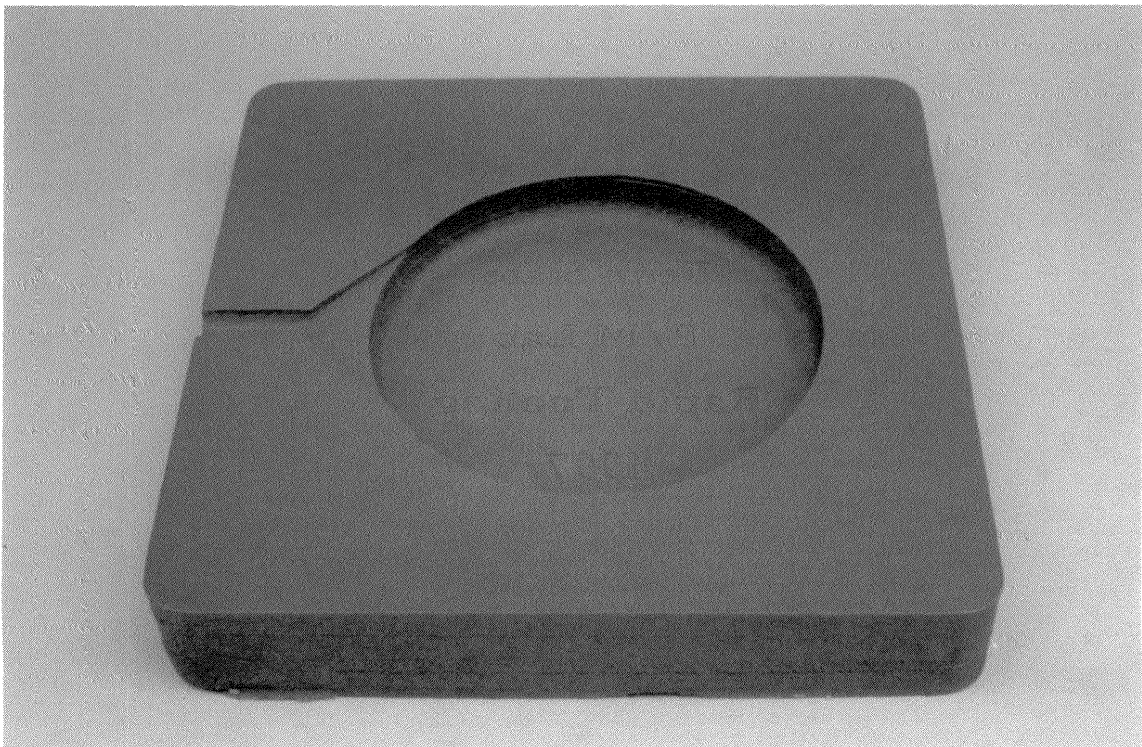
Picture of the Green Part Removed From the Silicone Rubber Mold.
